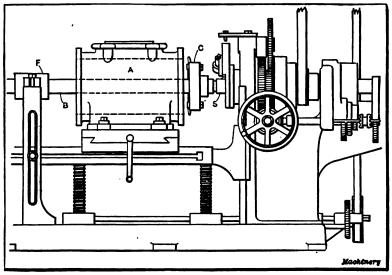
Cylinder mounted on Horisontal Machine for Boring
